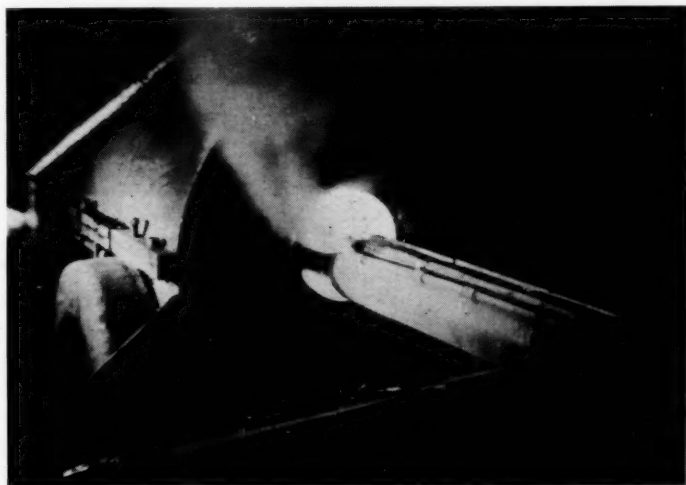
NOZZLE DISTRIBUTING COATING MATERIAL JUST BACK OF THE TROUGH SPOUT AS IT ISSUES FROM THE END OF THE MOLD.
